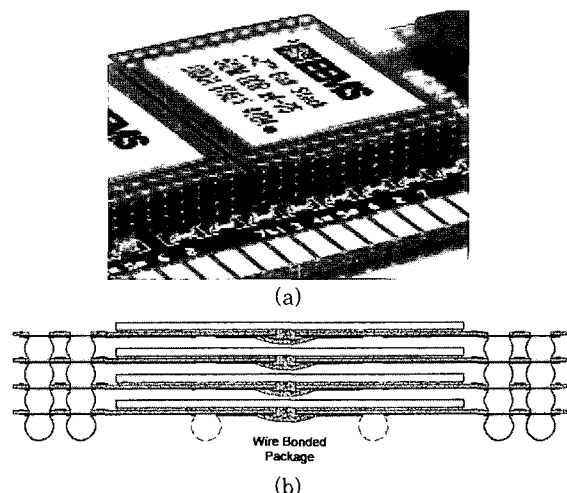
Stacked BGA package: (a) photo image and (b) cross-sectional schematic
